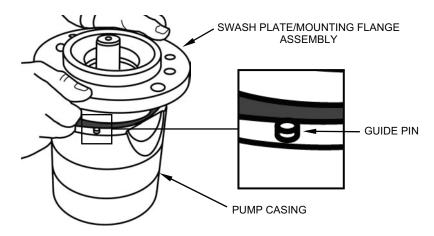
Installing Swash Plate/Mounting Flange Assembly into Pump Casing.
